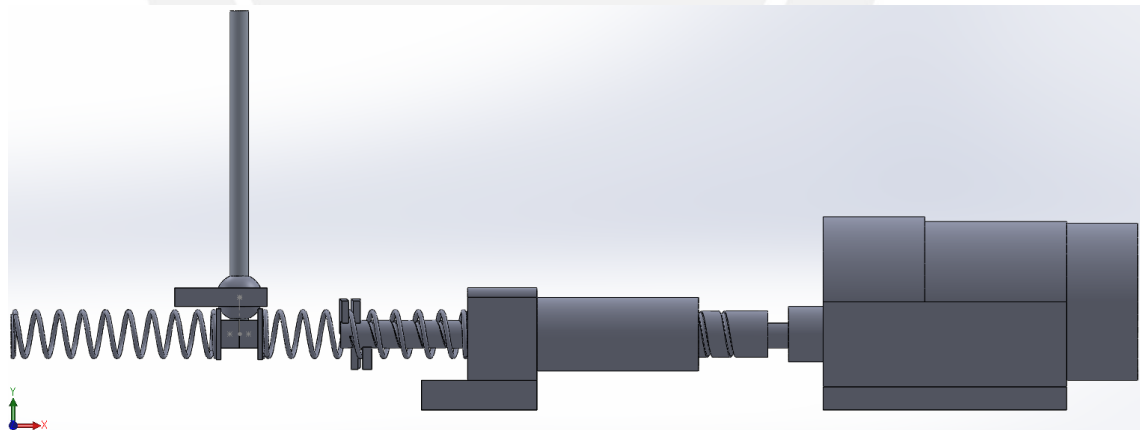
Frontal view of the multi-body model implemented in Solidworks 2016
